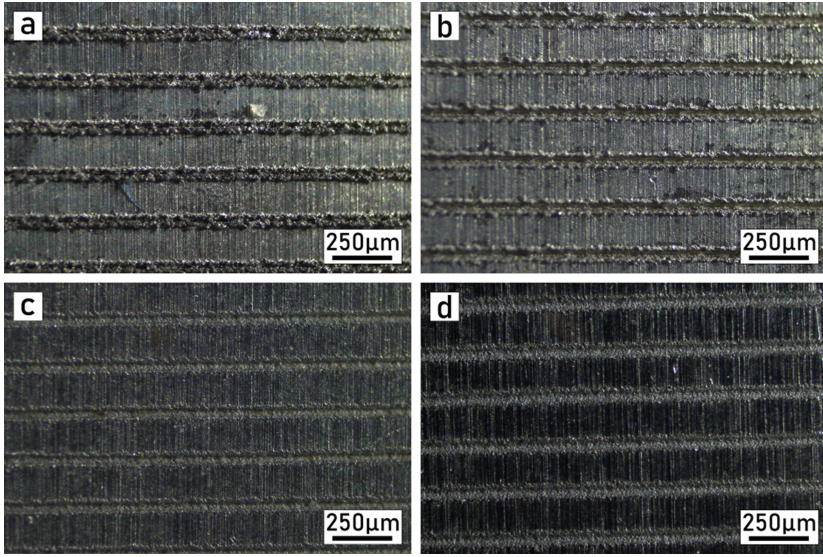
Surfaces of laser engraved aluminum alloy 6061 plates in relation to laser scanning speed: 75 mm/s (a); 150 mm/s (b); 250 mm/s (c); 350 mm/s (d).
